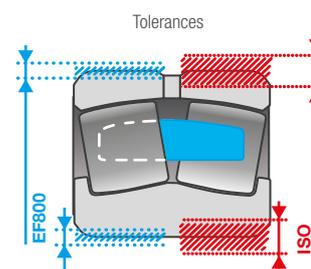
Special tolerances for the outer diameter and bore
